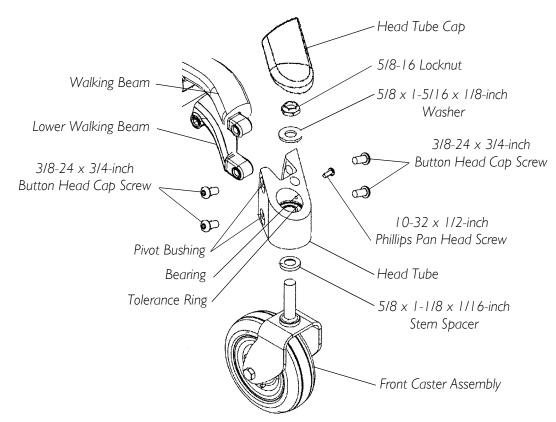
REMOVING/INSTALLING THE HEAD TUBE AND FRONT CASTER ASSEMBLY
